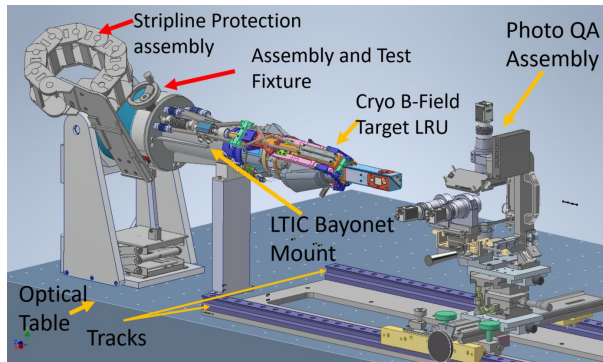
Target LRU Assembly and Test Stand with Photo QA System
